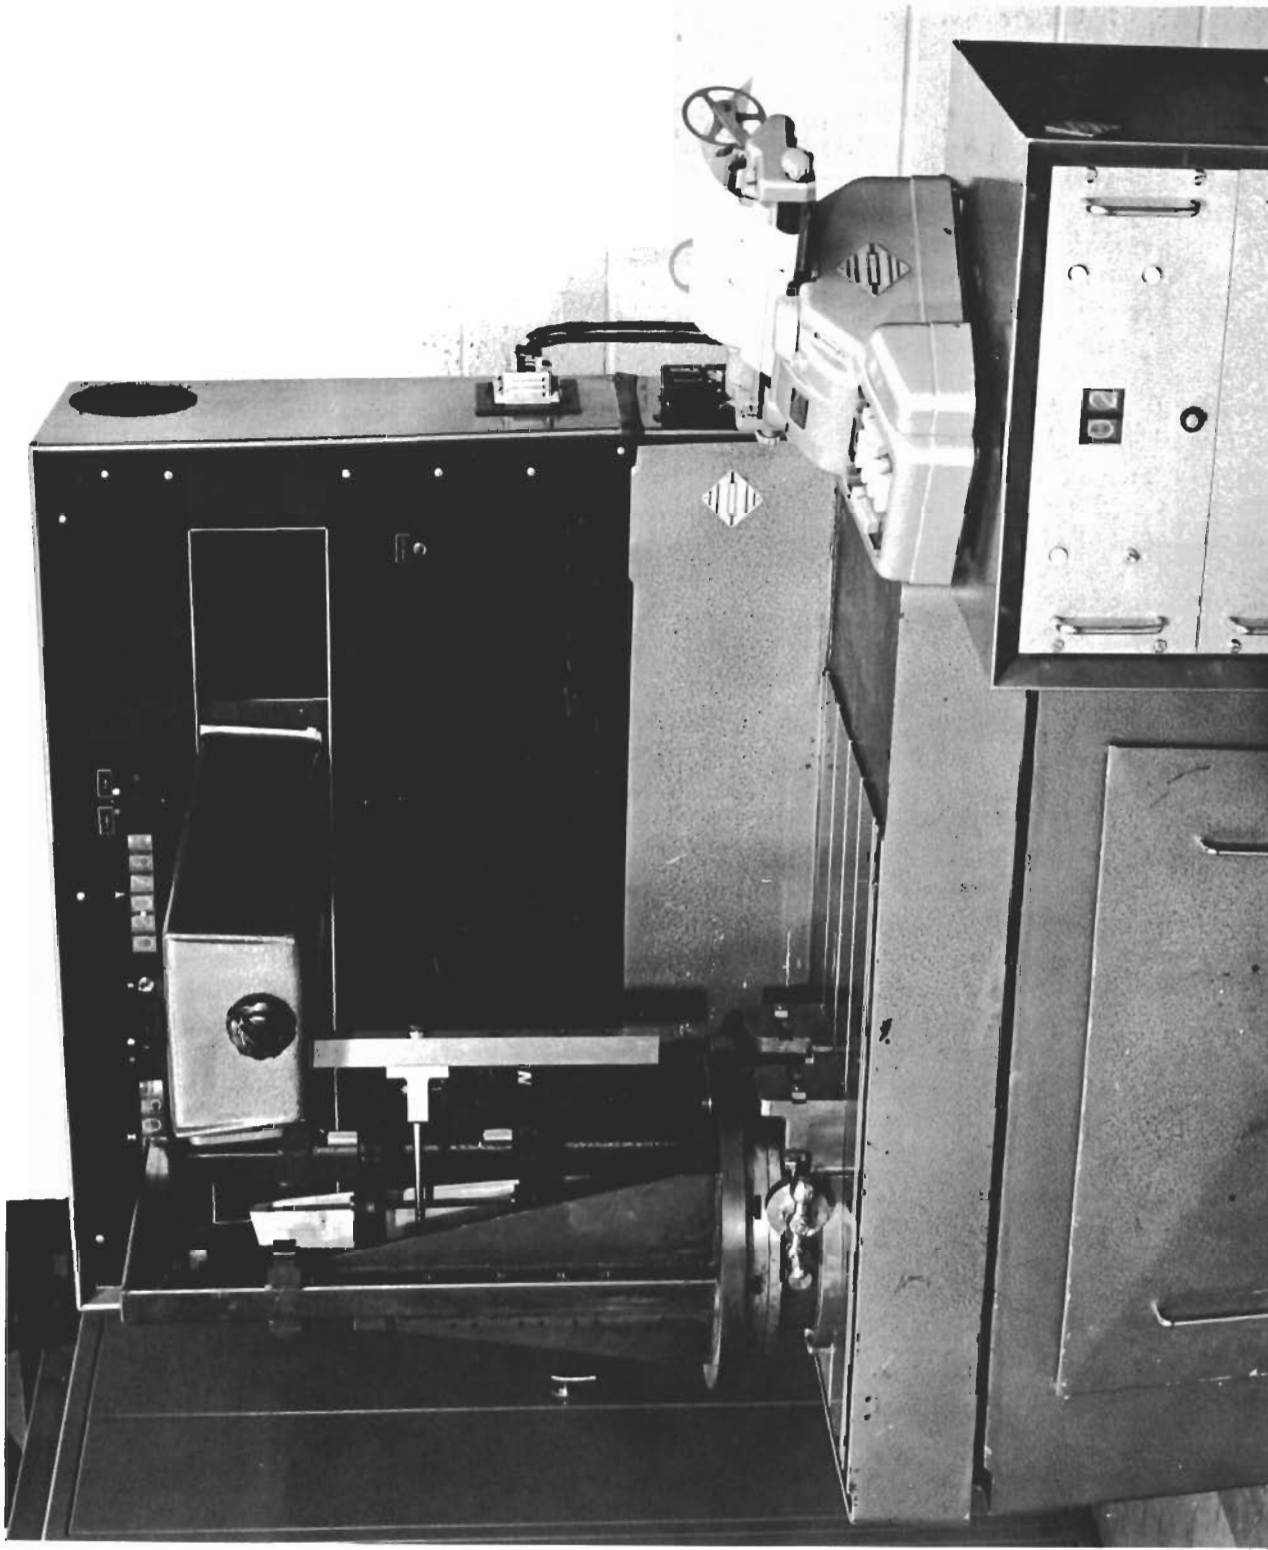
Sheffield-Ferranti Type 52 Coordinate Inspection Machine with Holding Fixture and Fin Rib Forging as Employed to Obtain "X-Y" Profile Data at Section Planes Illustrated in Figure 85. Note Accessory "Print Out" Unit also Employed to Record Data.
